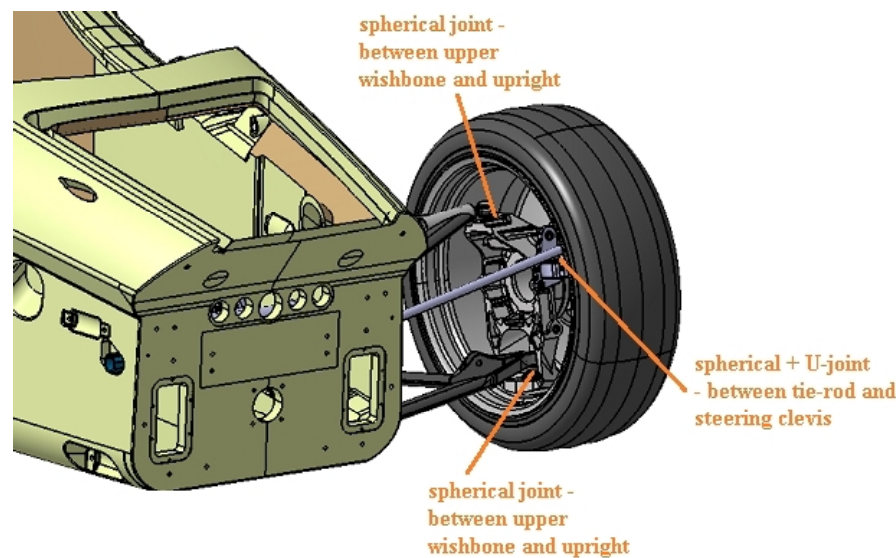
DMU Kinematics simulation Assembly – right-front view
